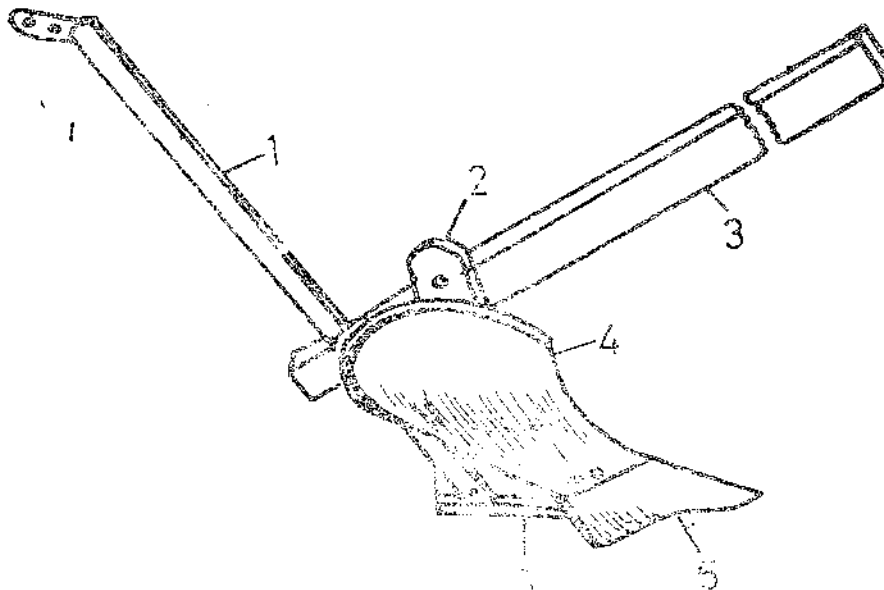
Animal mould board plough. 1. Handle. 2. Standard. 3. Beam. 4. Mould Board. 5. Share. 6. Landslide.
